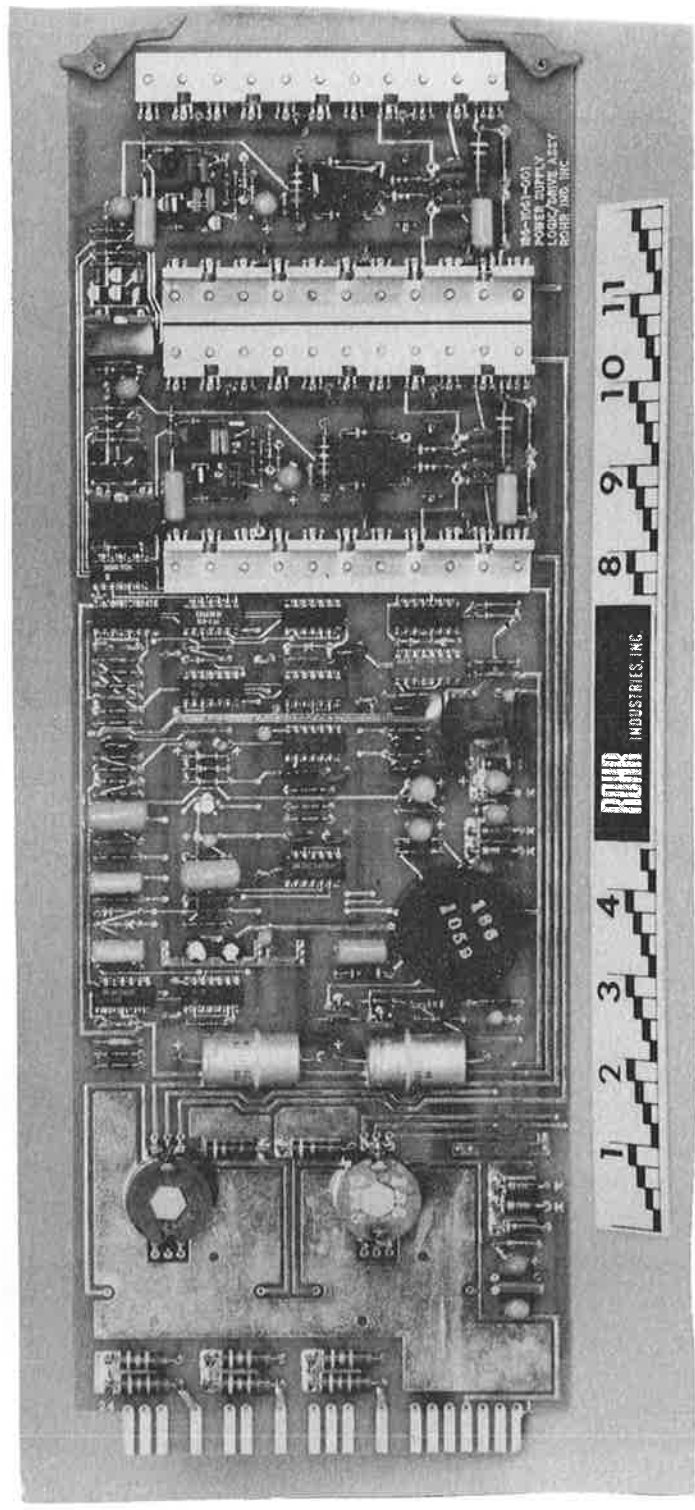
POWER SUPPLY MODULE, LOGIC/DRIVER ASSEMBLY
